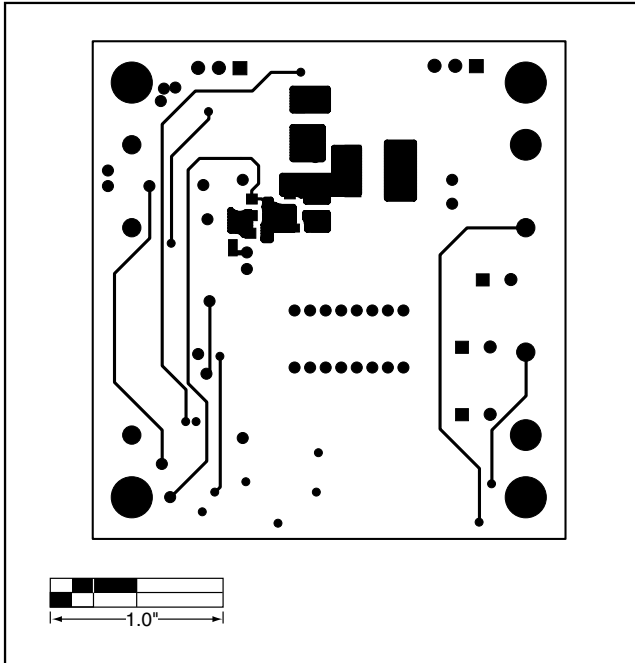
MAX5015 EV Kit PCB Layout—Solder Side
